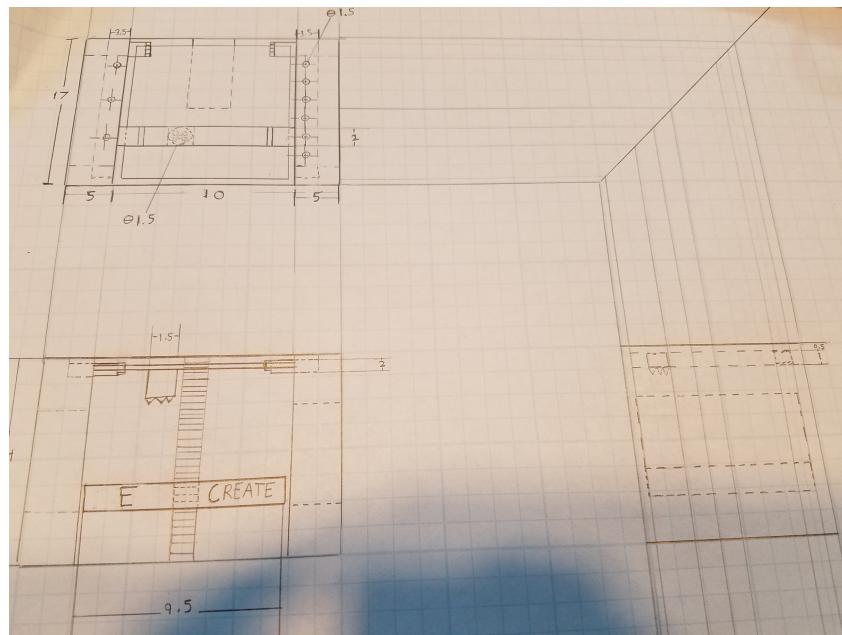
Ferrarer, Auston: 3D Printer
